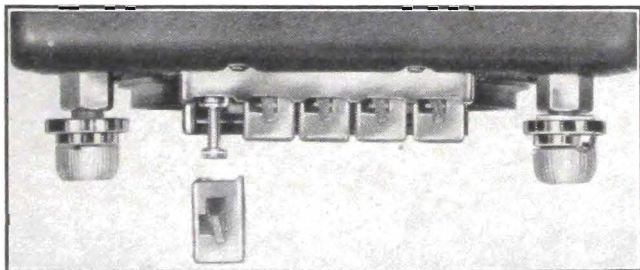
Removing "Push Button" (Also see Fig. 12-115)
